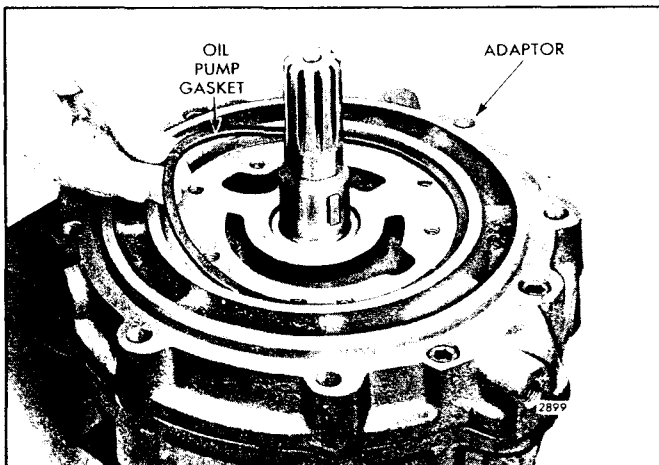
Installing Oil Pump Gasket in Adaptor
